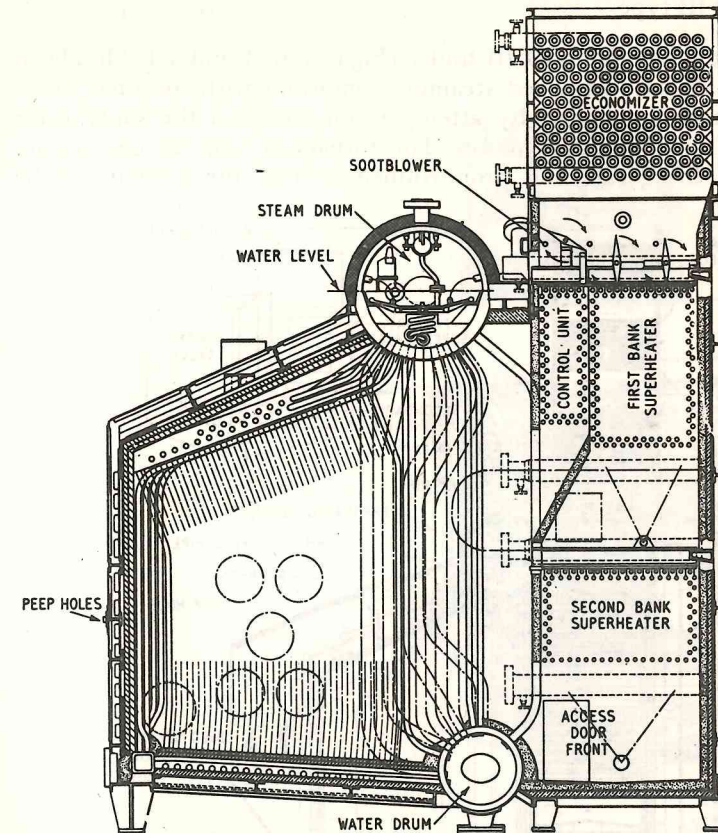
Sectional view of Foster Wheeler ESD II boiler
